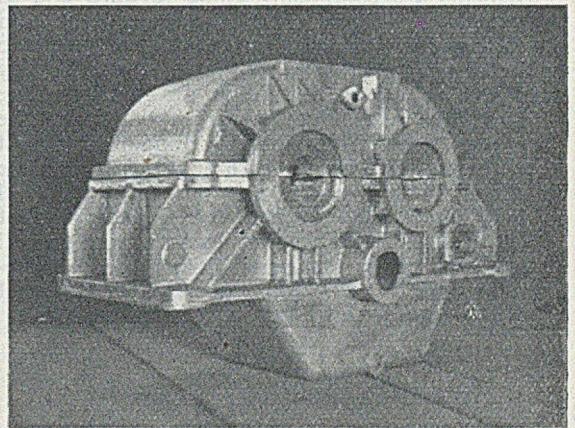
Pair of Silicon-aluminium Gear-case Castings.
